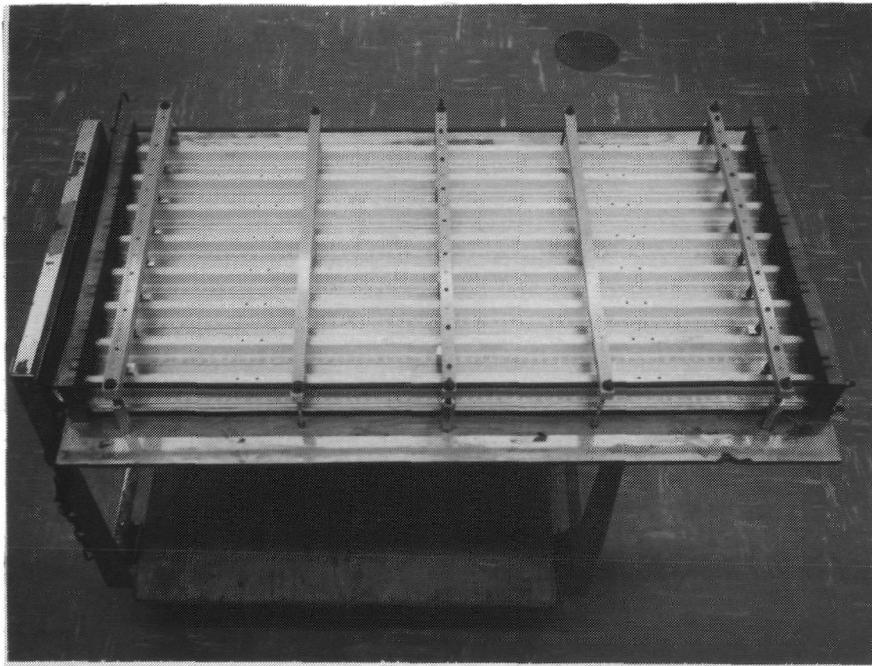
Compression Panel in Bonding Fixture Immediately after Removal from Autoclave after Postcuring.
